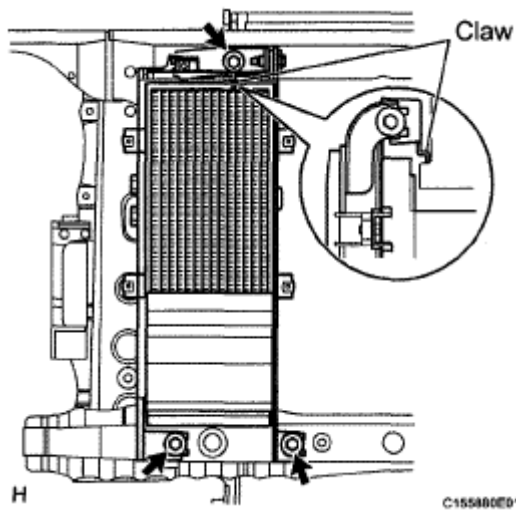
Attaching Claw Of Oil Cooler Into Hole Of Radiator Support
